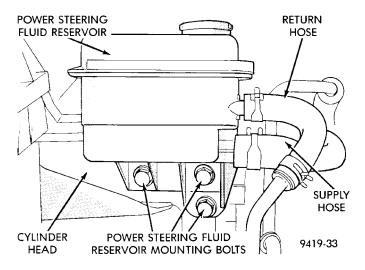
Power Steering Fluid Reservoir Hoses And Mounting
